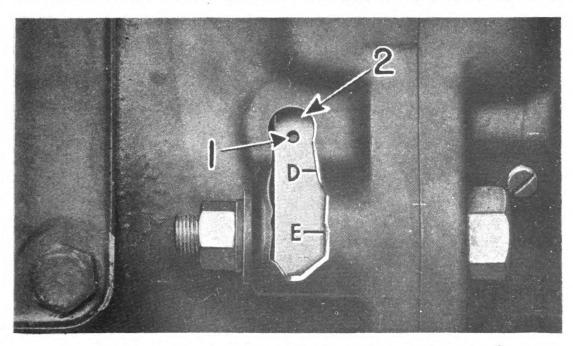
Inspection Hole and Timing Marks on Flywheel
